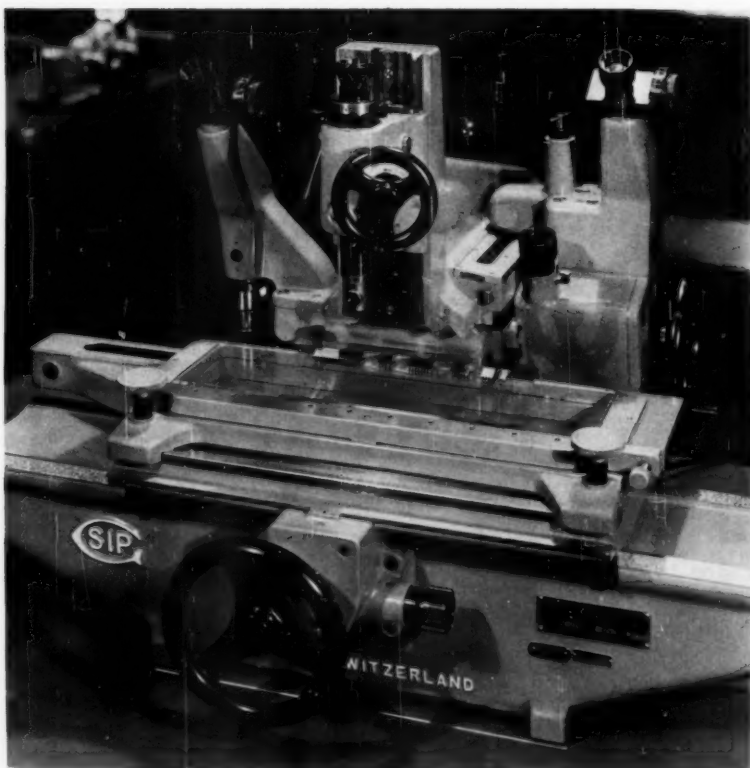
A SCIP MUL 214 with a 4 x 16-inch capacity, universal three dimensional measuring machine. It will measure the pitch diameter, round, straight and bellmouth of internal threads. Accurate to within twenty millionths of an inch.
